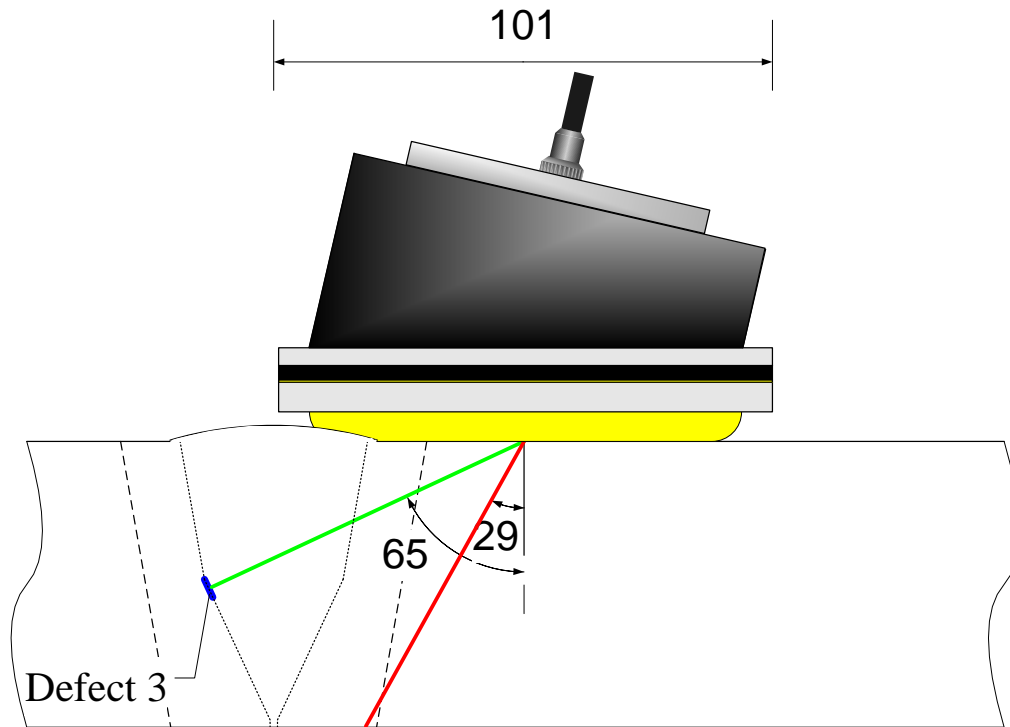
Schematic diagram of the experimental set-up used for the direct specular through weld detection of defect 3.
